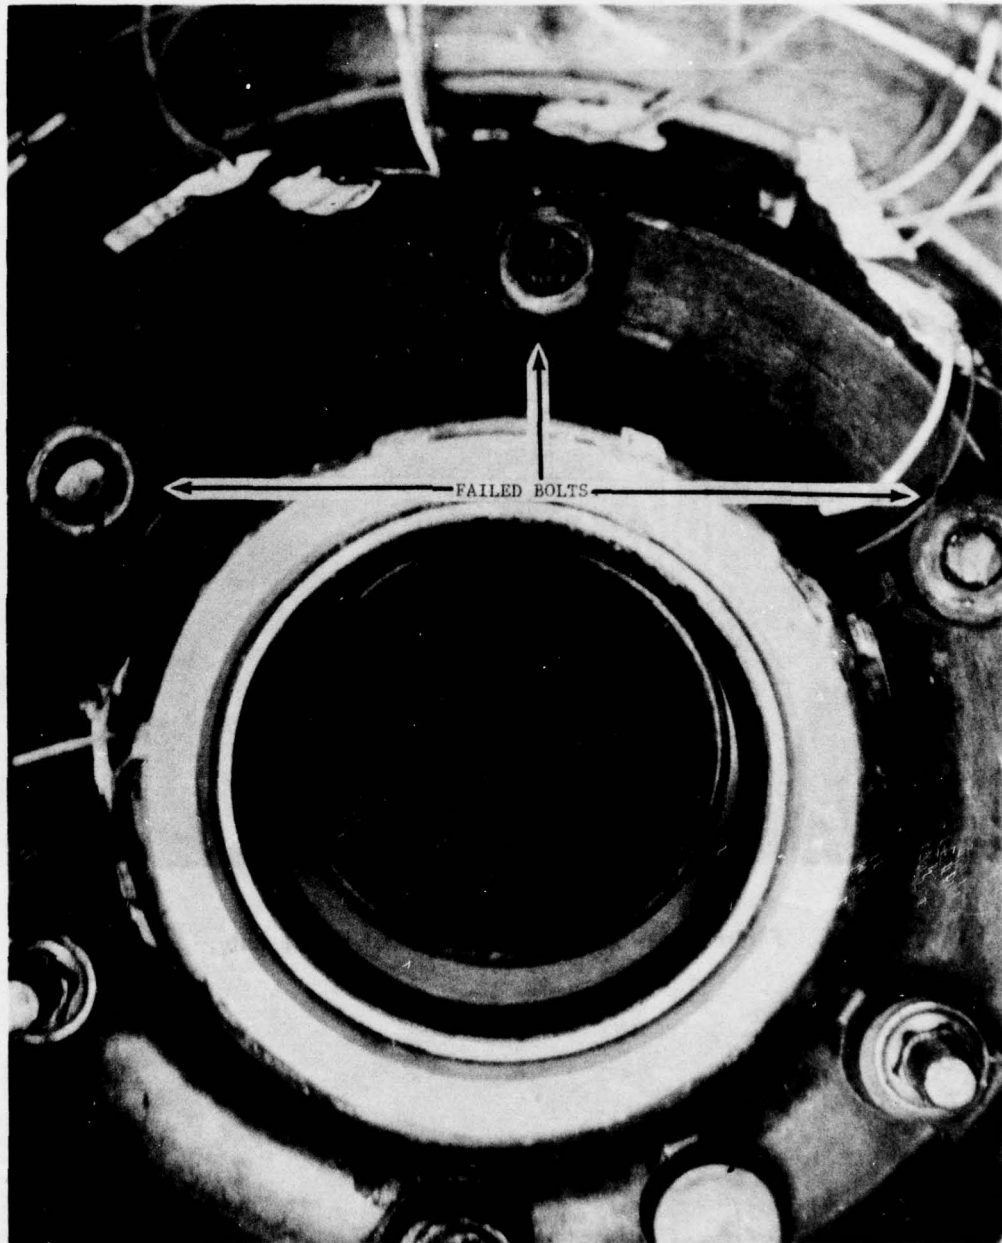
Fatigue Failure of 3 Wheel Bolts at 1093 Miles
